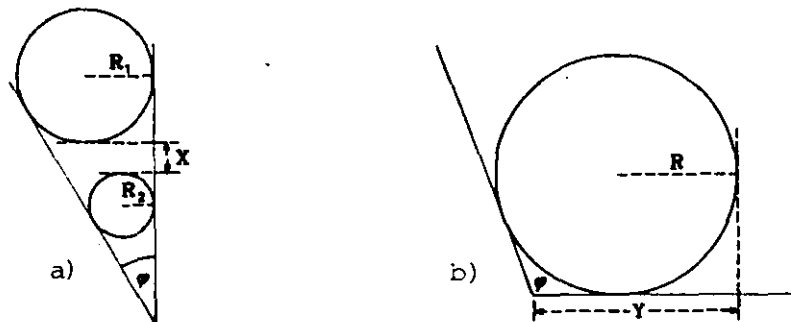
Sketches illustrating the methods used to confirm corner angles.
